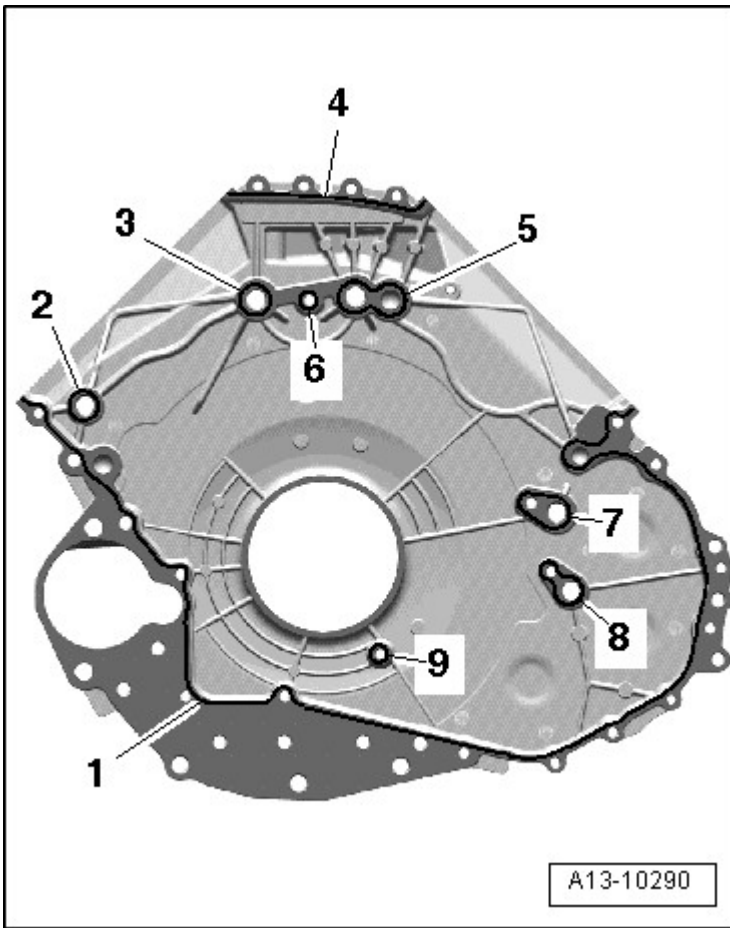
Applying Sealant Beads On Clean Sealing Surfaces Of Lower Timing Chain Cover
